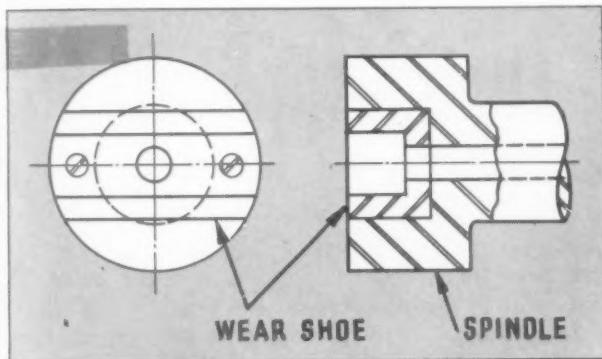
Section through spindle. Spindle heat treated or soft, but provided with a hardened and ground wear shoe or die guide.
